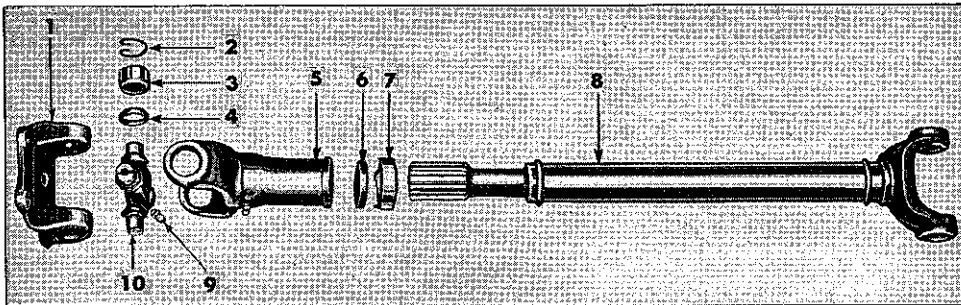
PROPELLER SHAFT AND UNIVERSAL JOINTS—NEEDLE BEARING TYPE
